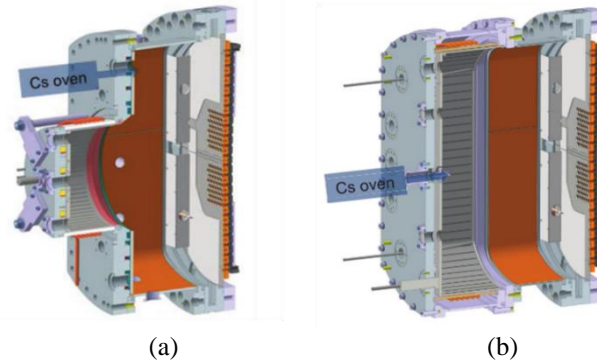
Drawing of the BATMAN source with (a) cylindrical driver and (b) racetrack shaped driver¹⁵.
